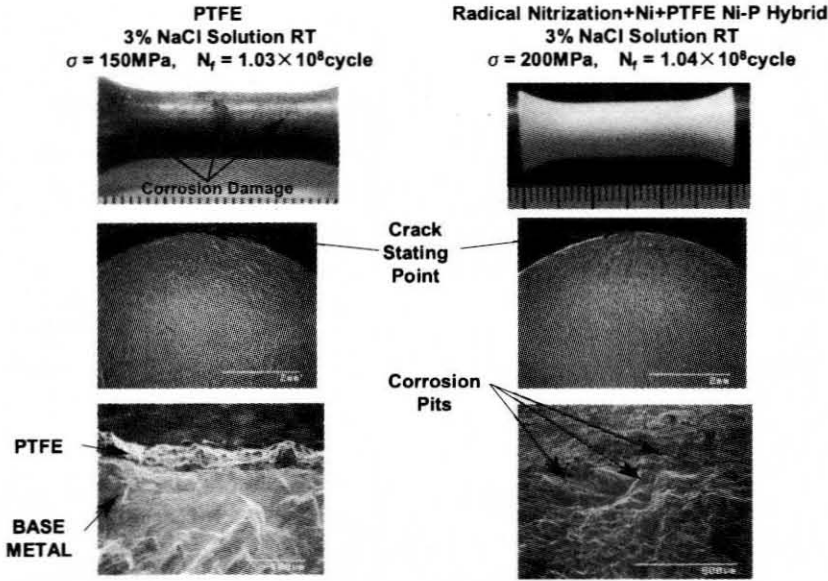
Macroscopic surface observation of corrosion fatigue test piece
